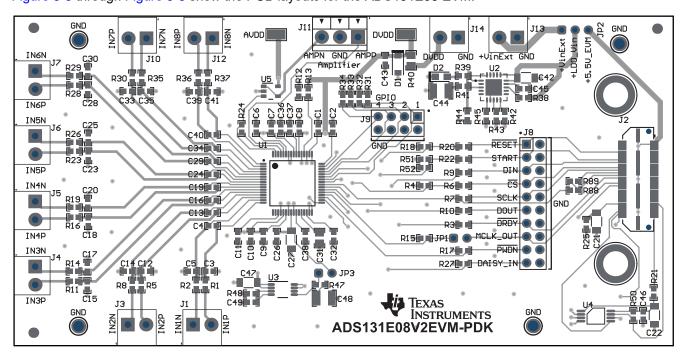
PCB Layout for the ADS131E08EVM (Top View)
